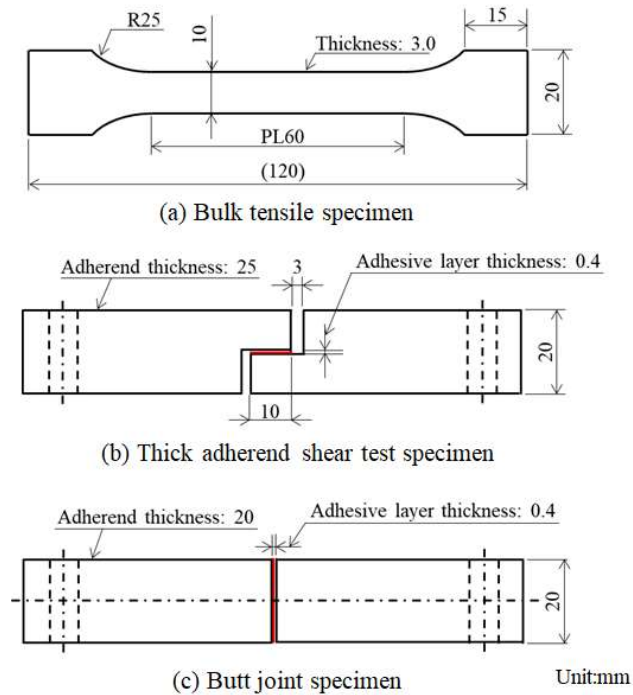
Geometry of bulk tensile specimen (a), thick adherend shear test specimen (b) and butt joint specimen (c).
